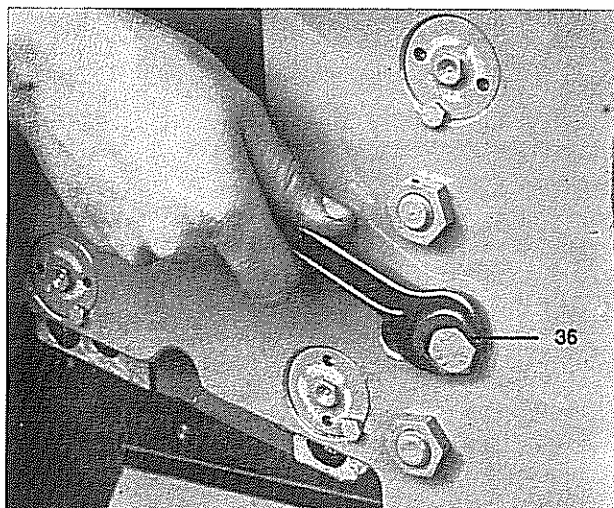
Readjustment of the bottom slide guide (cover plate side)
